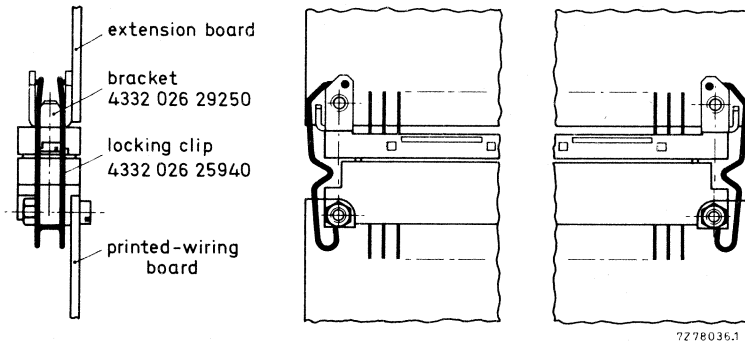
Mounting of a female part to an extension board with bracket having locking facility.
